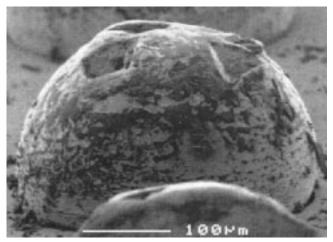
Pogo-Pin Type Electrical Contact Impressions on the Bottom of a Solder Ball
